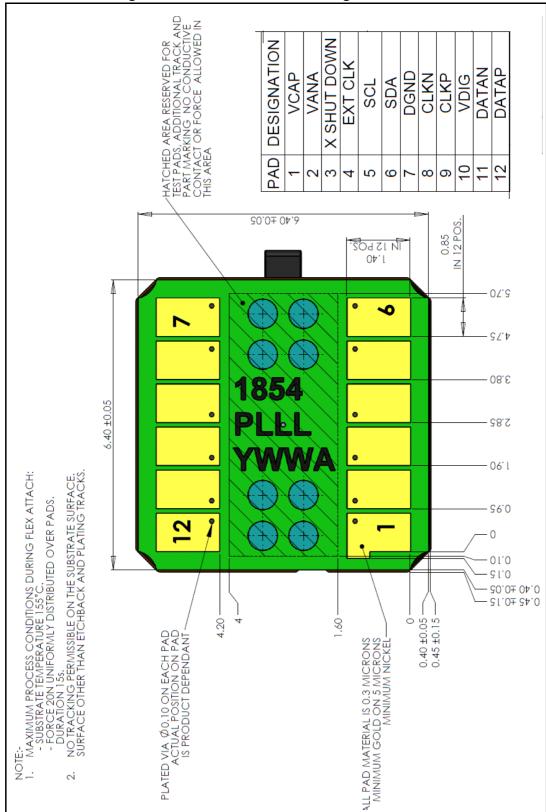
VX6854LC outline drawing - sheet 3 of 3
